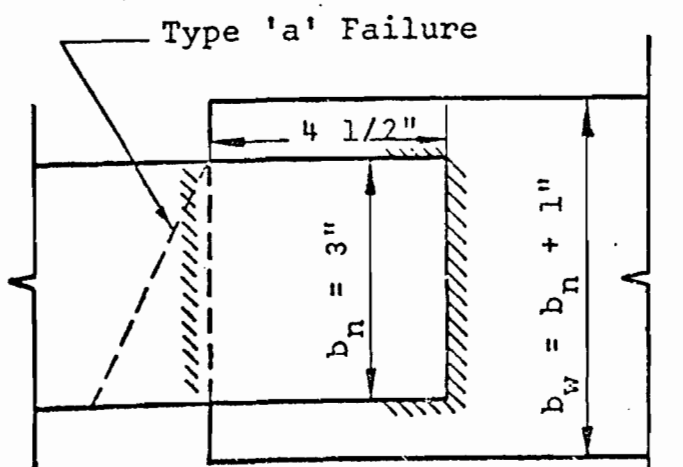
SINGLE LAP LONGITUDINAL FILLET WELD CONNECTION.
